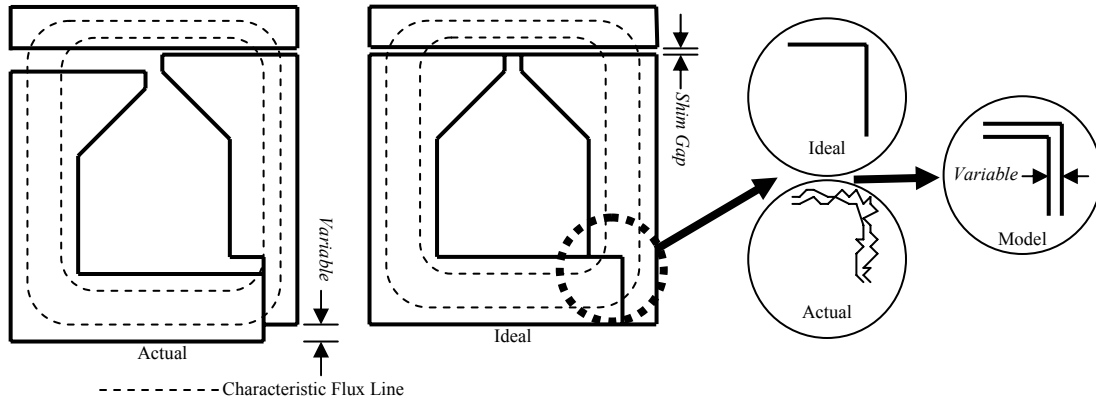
Three geometric tolerance uncertainties chiefly responsible for degraded valve performance: interface surface roughness, axial alignment, and shim gap tolerance.
